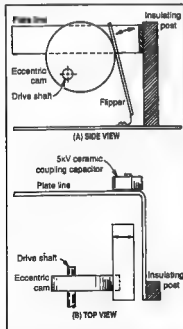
(a) Side view of plate tuning flipper showing eccentric cam which presses against the hinged flipper plate. Assembly is panel driven through a vernier drive. (b) Top view of plate assembly showing placement of main components.
